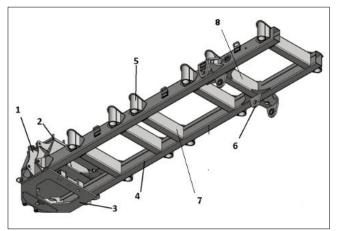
Trailer frame: 1 - support mounting, 2 - tank base, 3 - rotation plate, 4 - base frame longitudinal, 5 - fixing of bent stanchions, 6 - axle beam mounting brackets, 8 - axle beam the running
